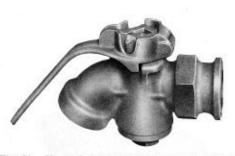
View of the Angle Cock showing Split Type Handle Socket
